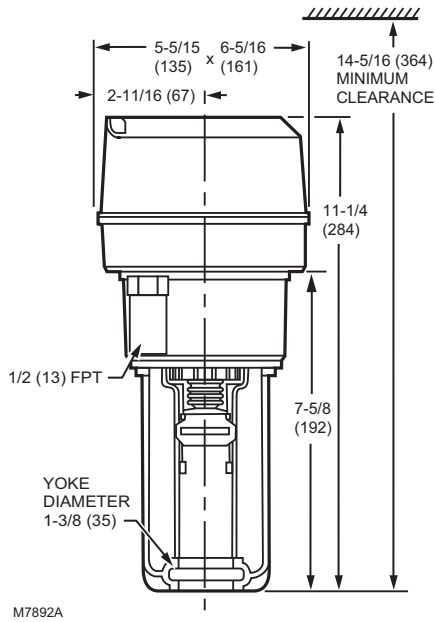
MP953C-F Pneumatic Actuator dimensions in in. (mm).
